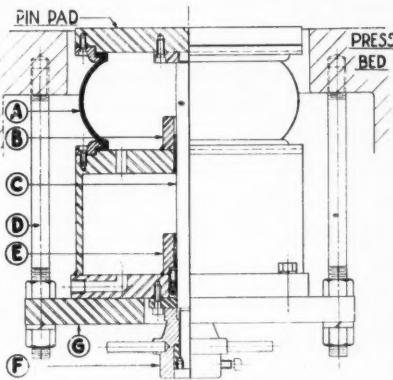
The four suspension rods D are mounted on the press bed frame by drilling and tapping.
